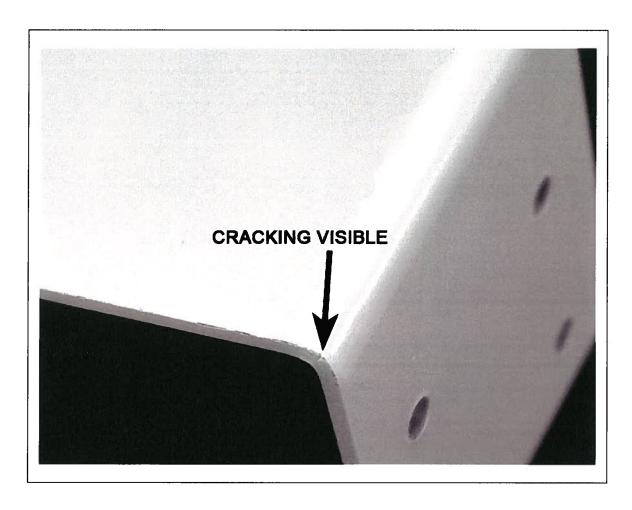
ANGLE MOUNT [206-930-122 (R/H)] – CRACKING SHOWN
